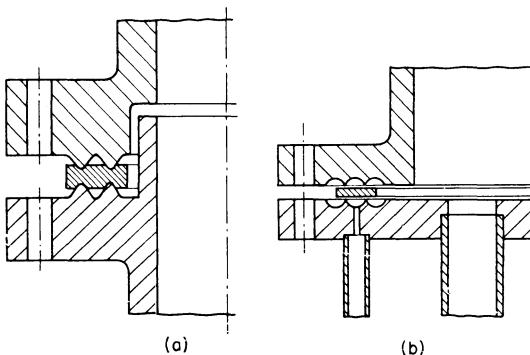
Double knife-edge seals: (a) without guard vacuum. After Marker⁸⁰⁵ (*Courtesy of Pergamon Press*); (b) with guard vacuum. After van Heerden⁵²⁸ (*Courtesy of The American Institute of Physics*)
